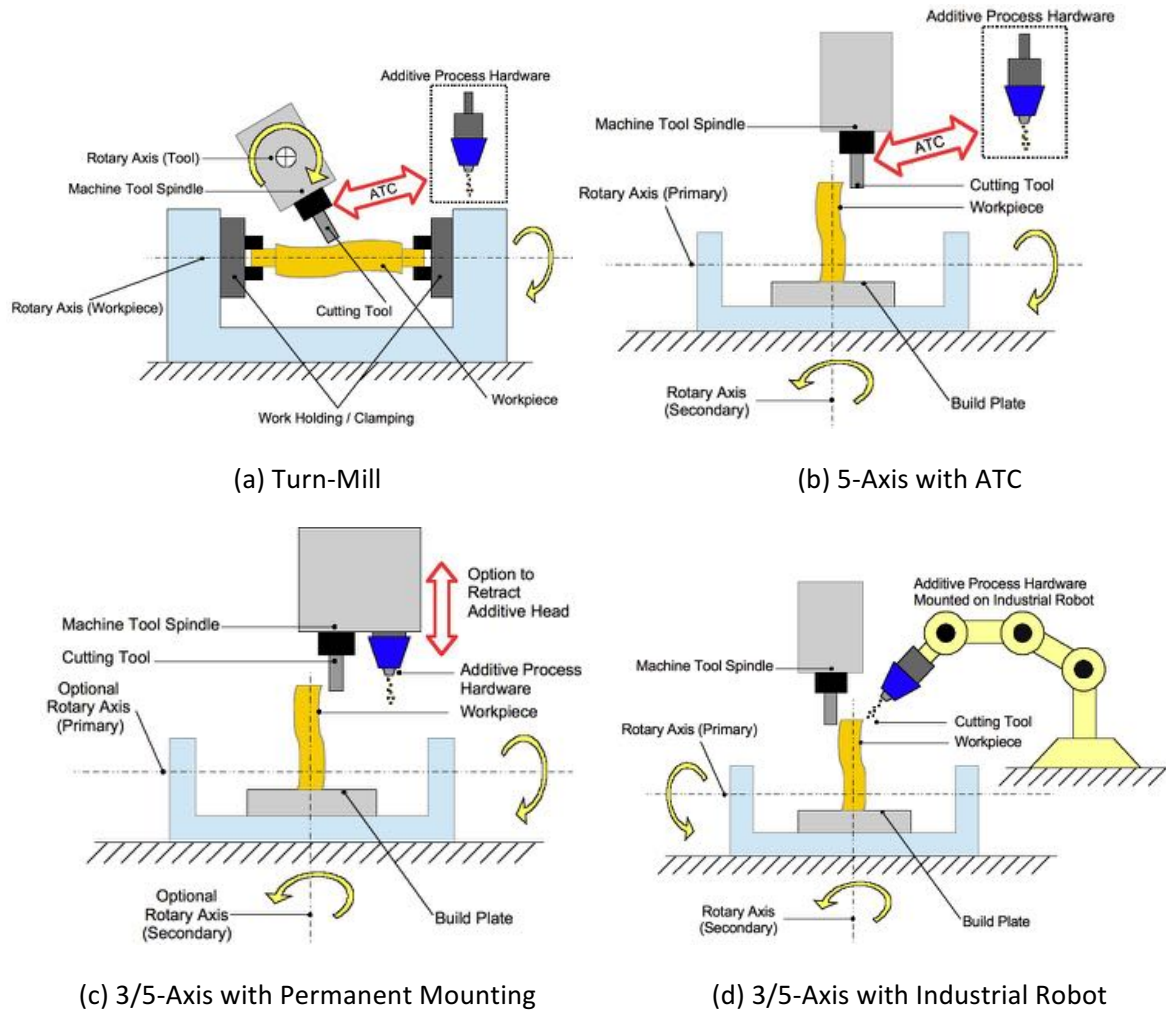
Machine tool configurations that are emerging as preferred methods of integration for CNC machining and DED processes
